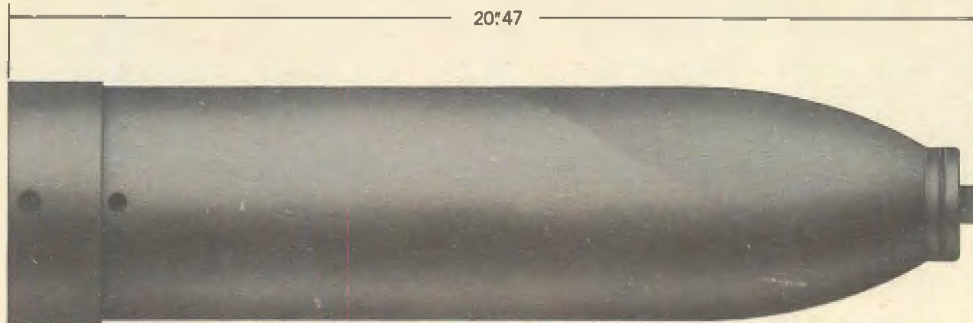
5.0-Inch Rocket Head Mk 13 Mod 0 (HE), External View.
